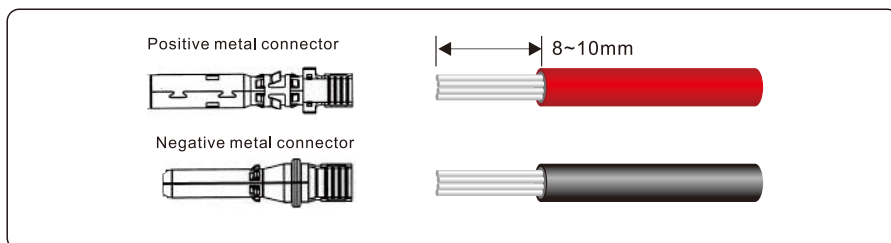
Removing insulation layer for DC cable (unit: mm)
